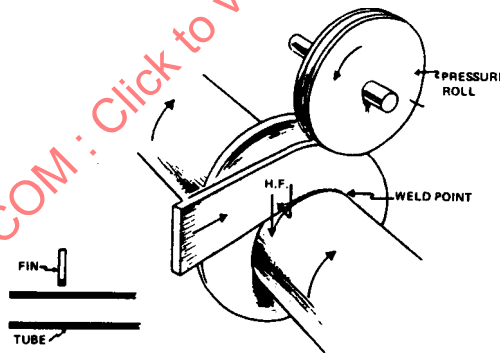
DIAGRAMMATIC SKETCH SHOWING METHOD OF WELDING SPIRAL FIN TO TUBE WITH HIGH-FREQUENCY RESISTANCE WELDING PROCESS (COURTESY: THERMATOOL DIV., AMF CO.)
